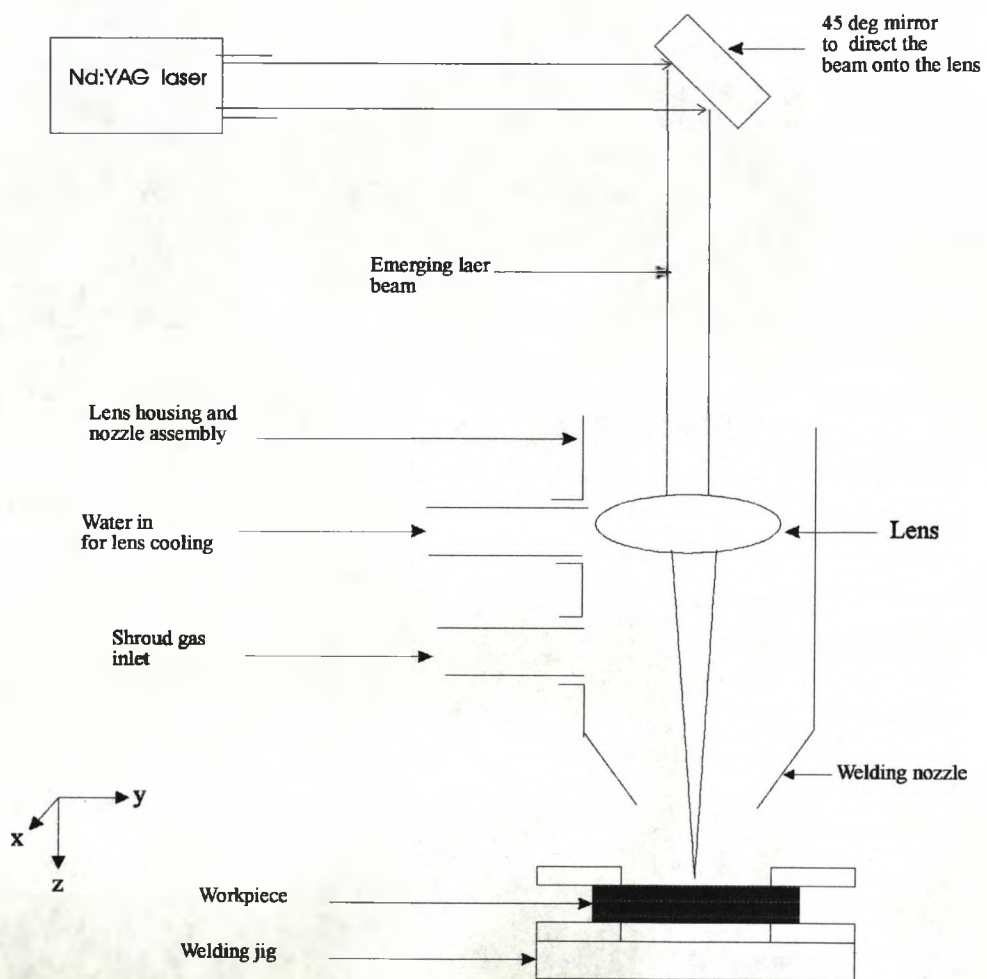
Experimental arrangement for pulsed laser welding
